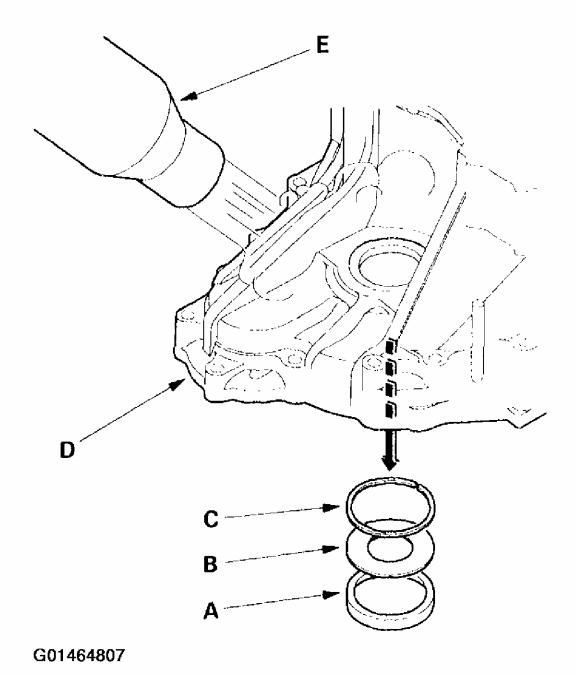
Removing The Bearing Outer Race, Thrust Washer & Thrust Shim From The Transmission Housing
